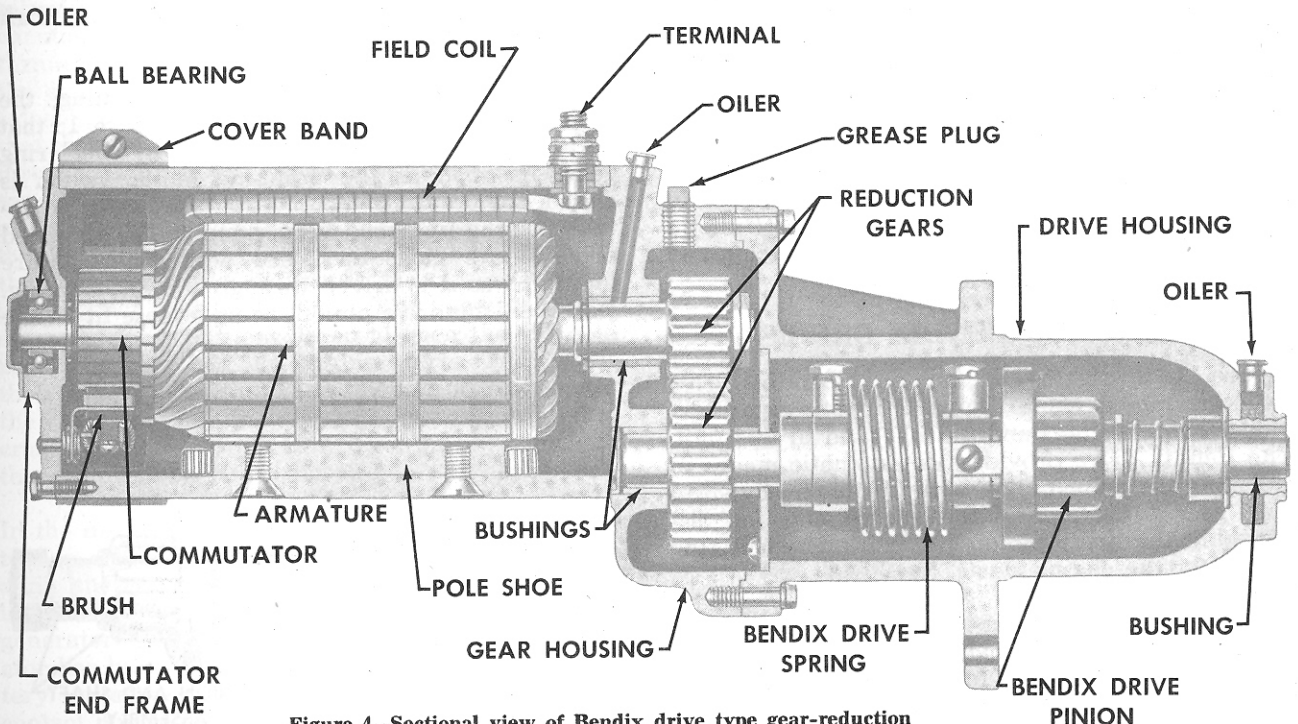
Sectional view of gear-reduction type cranking motor using a Bendix drive.
